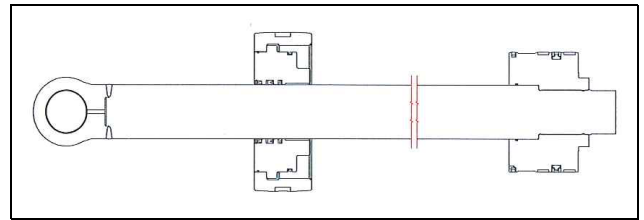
Fix Rod Assembly (Main Boom Lift Cylinder)
